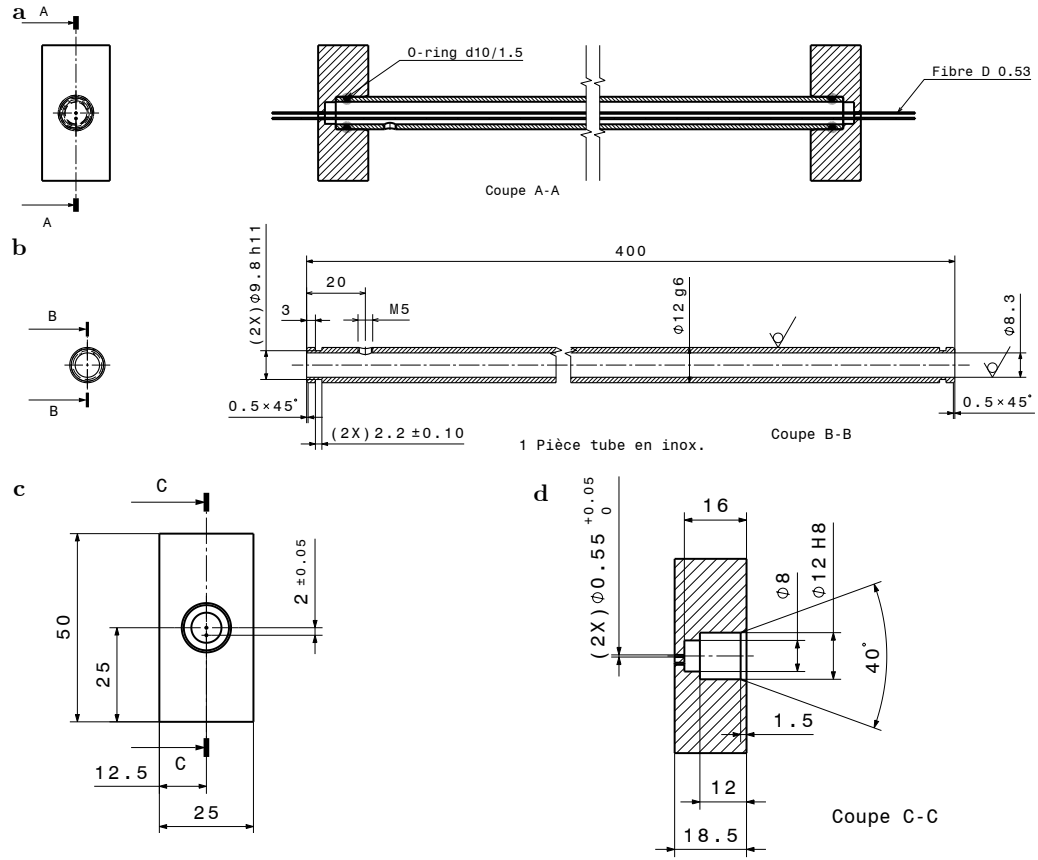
Drawing of the cylindrical mold and the aligners. a, Overall view on stainless steel cylinder, two aligner pieces, and the slender fibers. b, Geometric measures of the cylindrical mold, including a tap machined hole on one side and a notch for an adapted O-ring lathed on both ends. c, Top view on the so-called aligners that close the open ends of the cylinder while allowing slender nylon fibers to pass by. d, Side view on the aligner with geometric measures, showing the 4 mm gap between the end of the cylinder and the aligners wall that facilitates the demolding procedure.
